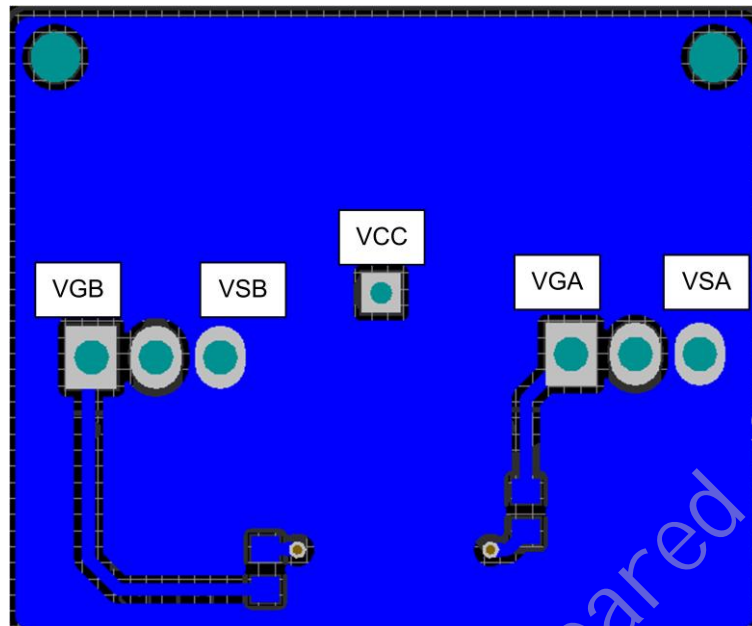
MK1620 Demo Board Layout (Bottom Layer)
